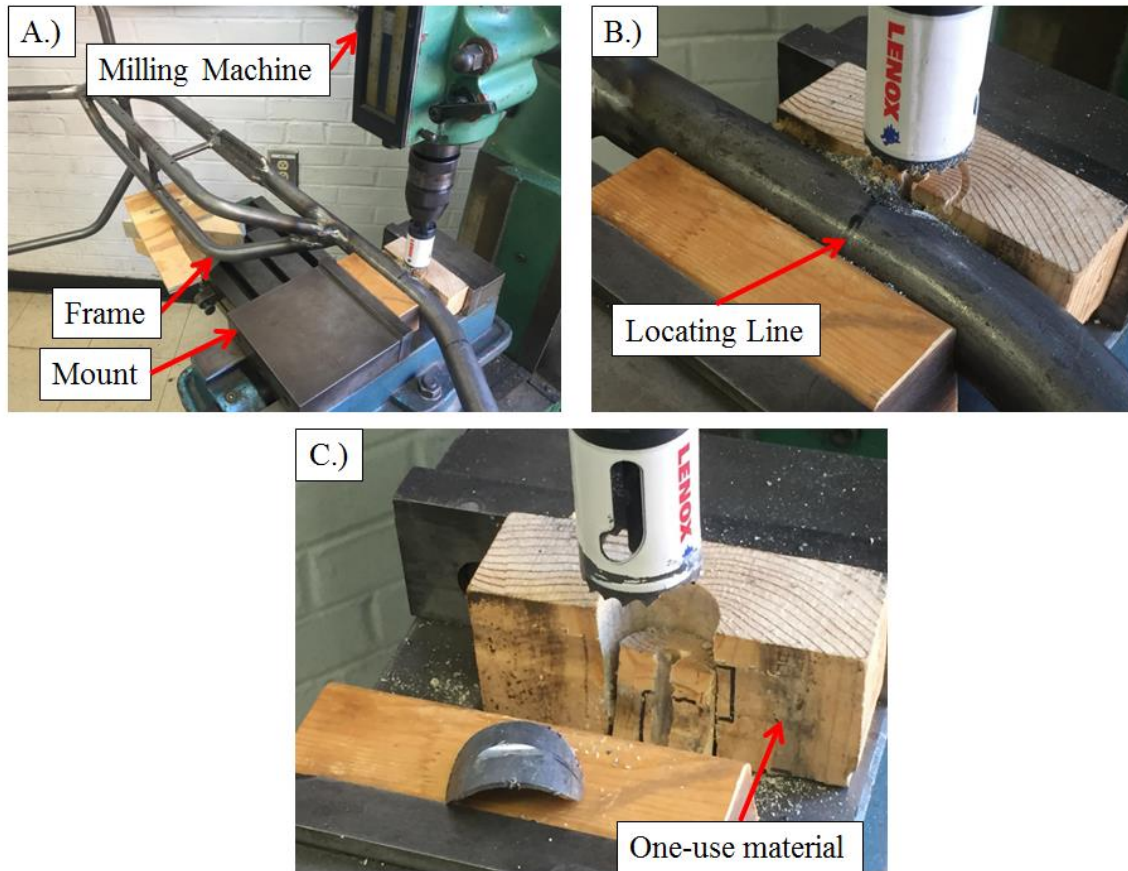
Mitering an offset hole A.) Frame mounted to milling machine B.) Setup of Miter before fabrication C.) Setup after fabrication
